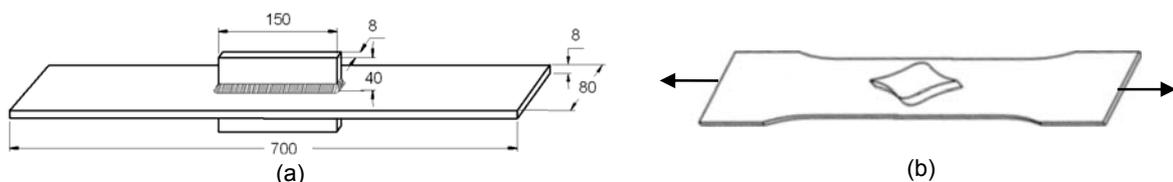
Specimens for Q-FAB and IIW fatigue testing
